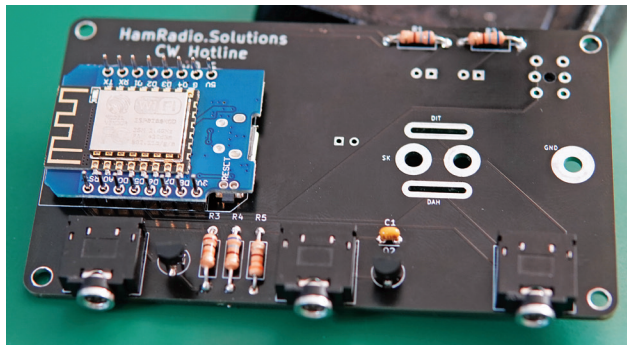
A nearly assembled board ready to be soldered into place. But wait! The ESP8266 shown here is placed incorrectly. Always double-check that you have the electronics part in the correct orientation prior to soldering the components in place.
